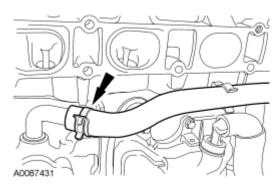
Locating Bypass Hose To Coolant Outlet Courtesy of FORD MOTOR CO.
